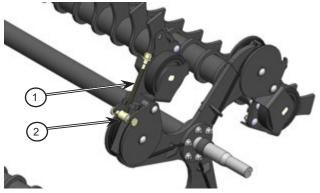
Install tension bolt and bar (Only reel shown for clarity)
